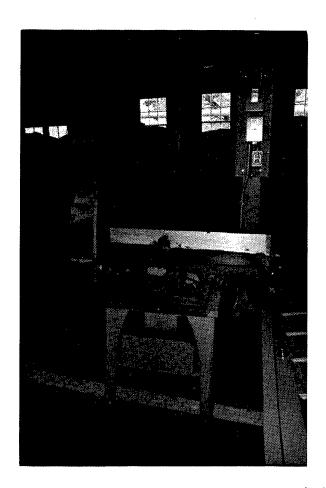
Building 6874-1: Jointer manufactured by Walker-Turner in the Rocket Area Shop.
